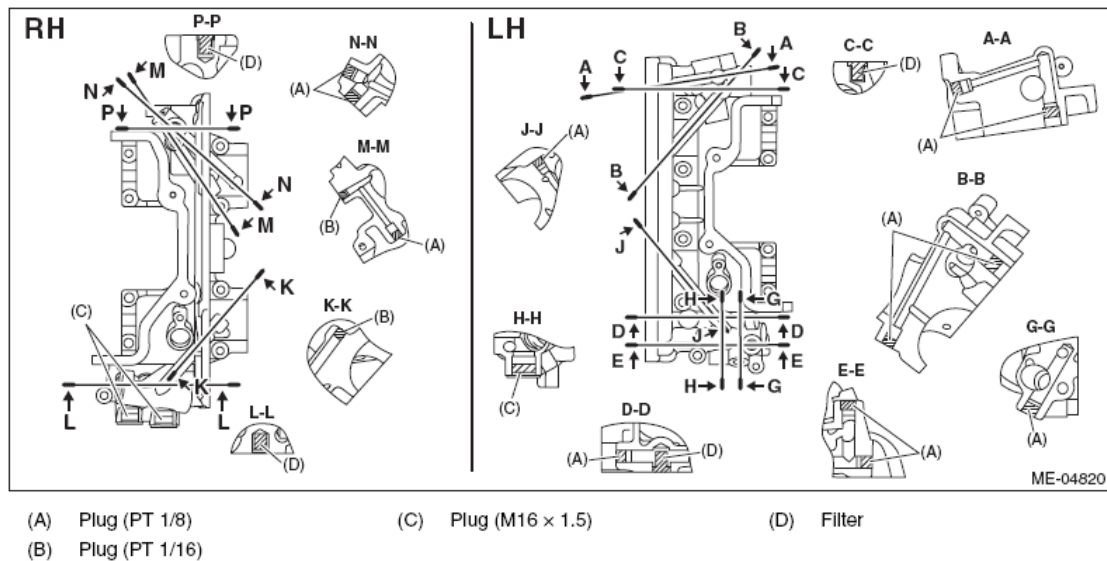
Removing Plug And Filter From Front Camshaft Cap
